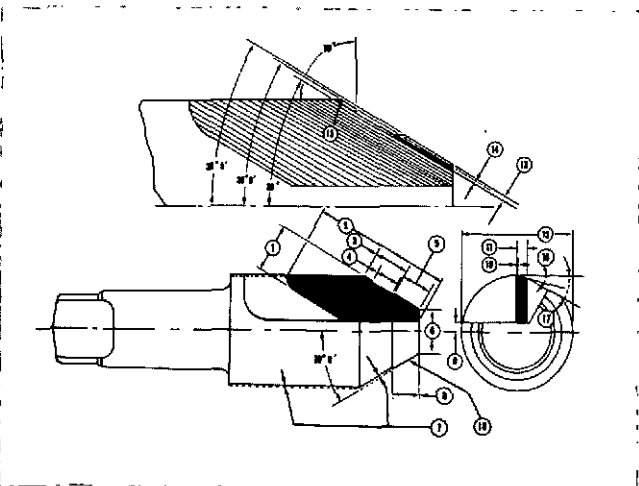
, N20213, ST-884 Injector seat cutter dimensions
